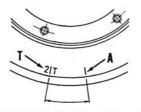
Flywheel has TDC mark (T) for each piston. Use mark (A) when setting fuel injection timing for each cylinder as outlined in text.
